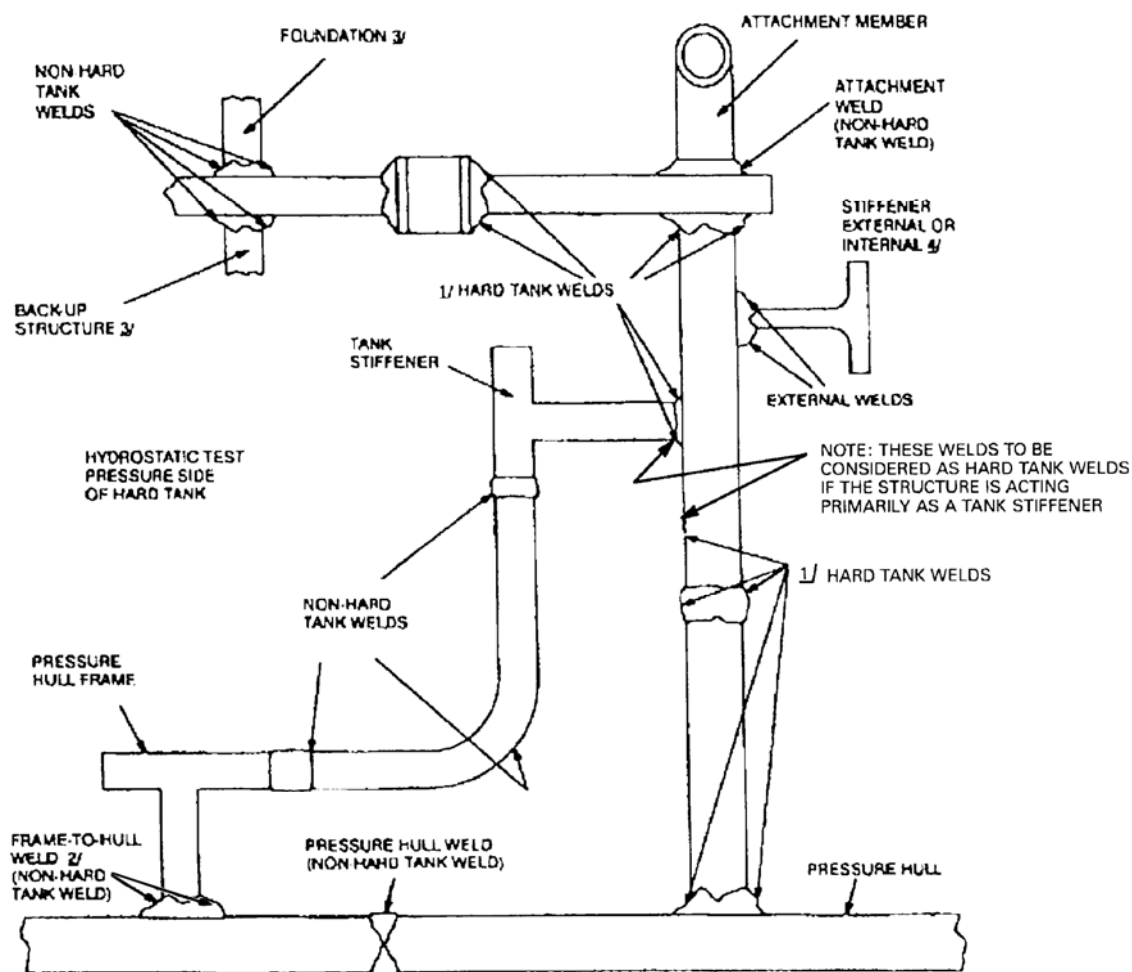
EXAMPLES OF MEMBERS FOR ATTACHMENT WELDS.
